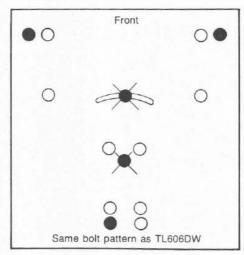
HMK-2 Board, Top View Horn extended from cabinet (for lateral horn rotation)
